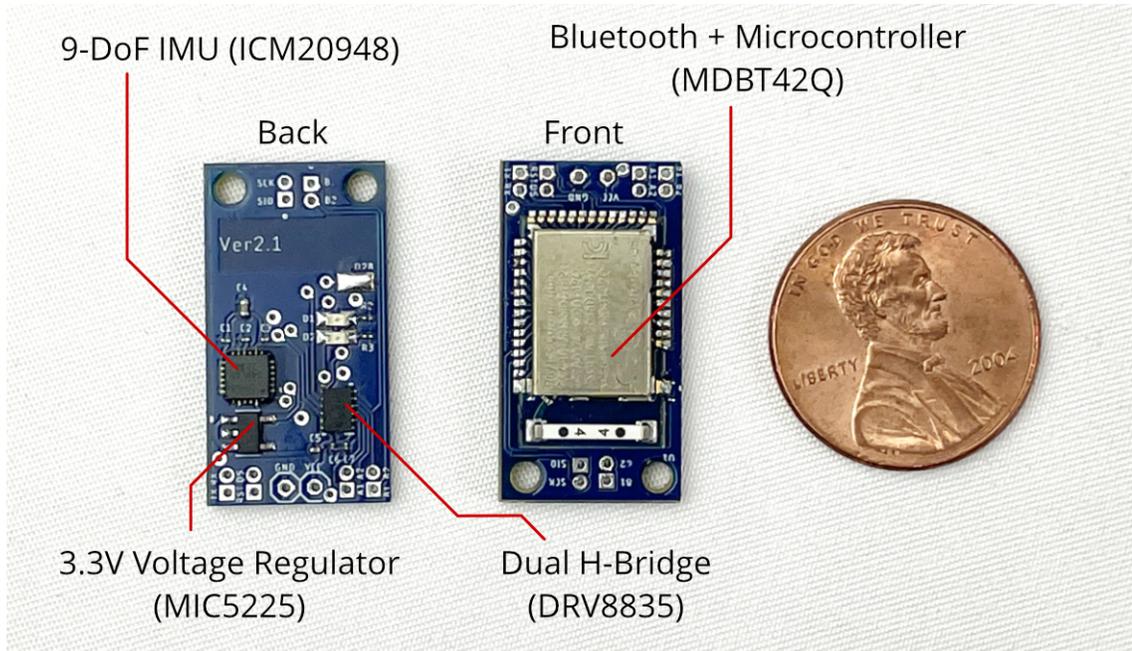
Custom PCB designed to maintain a small device footprint.
